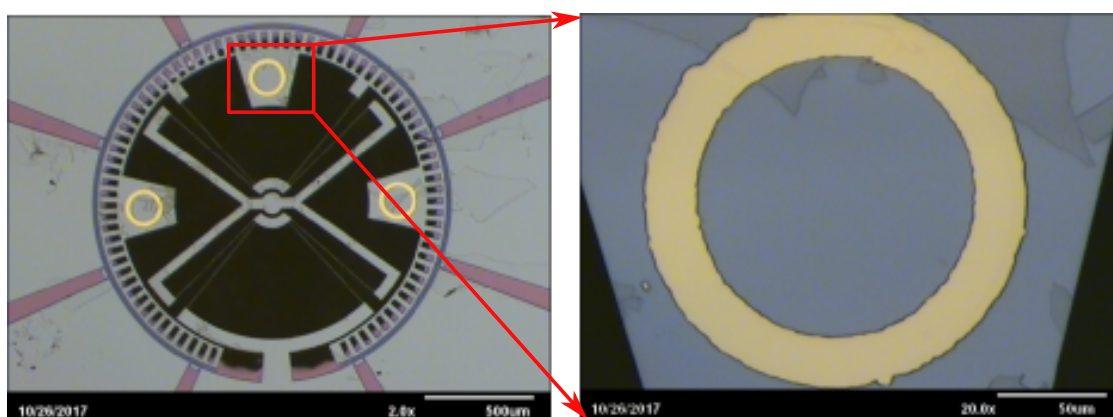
Micro stepper motor re-fabricated by with a gold ring on the glue deposition pads.
